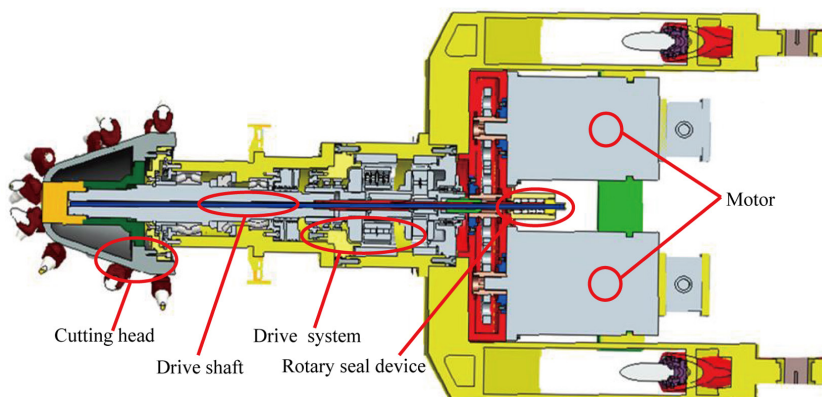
Structure of roadheader cutting unit with rotary seal device
